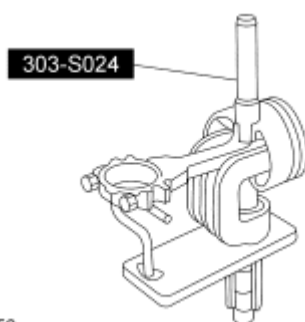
Using Special Tool (303-S024) To Remove Piston Pin
